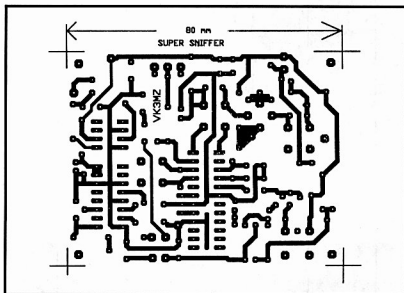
VK3MZ Super Sniffer PC Board (Actual Size).
